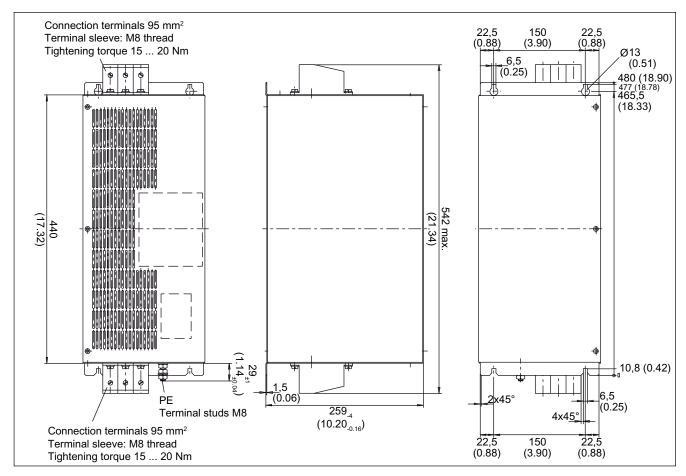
Dimension drawing of Wideband Line Filter 80 kW for Active Lines Modules, all dimensions in mm and (inches)
